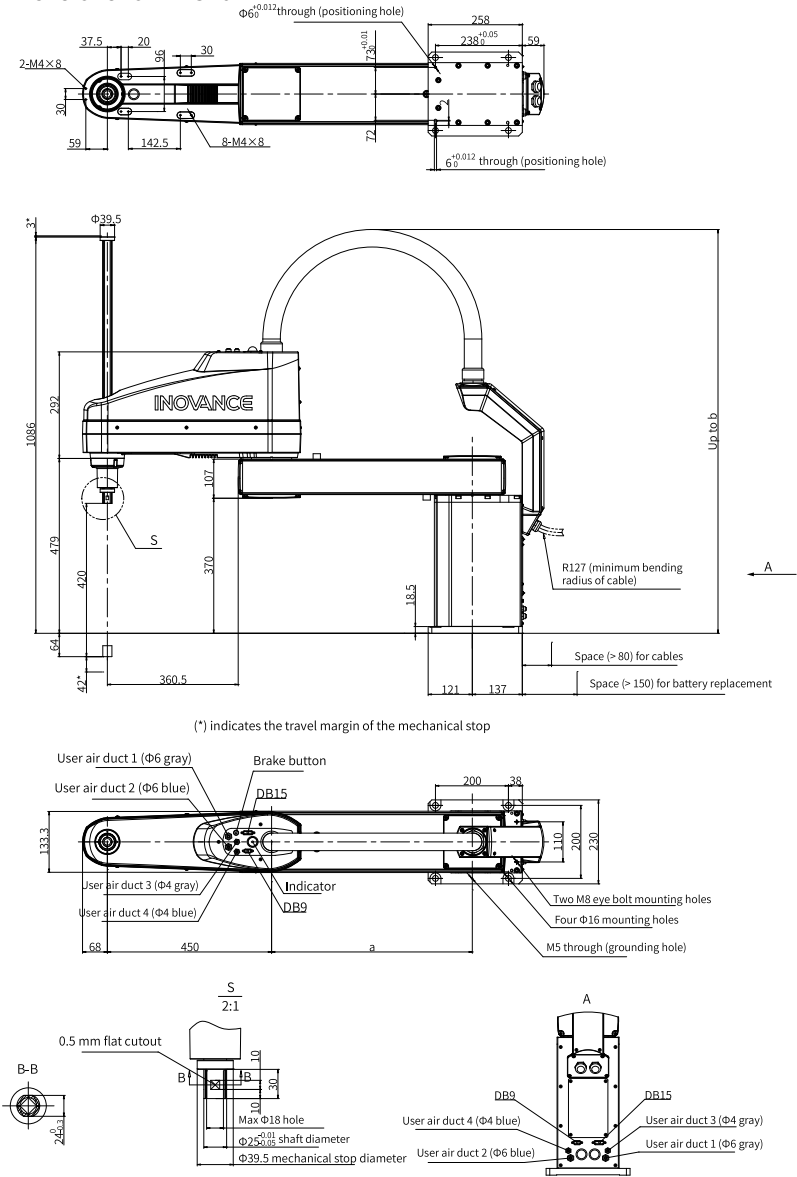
Outline dimensions for IR-S20 (unit: mm)
